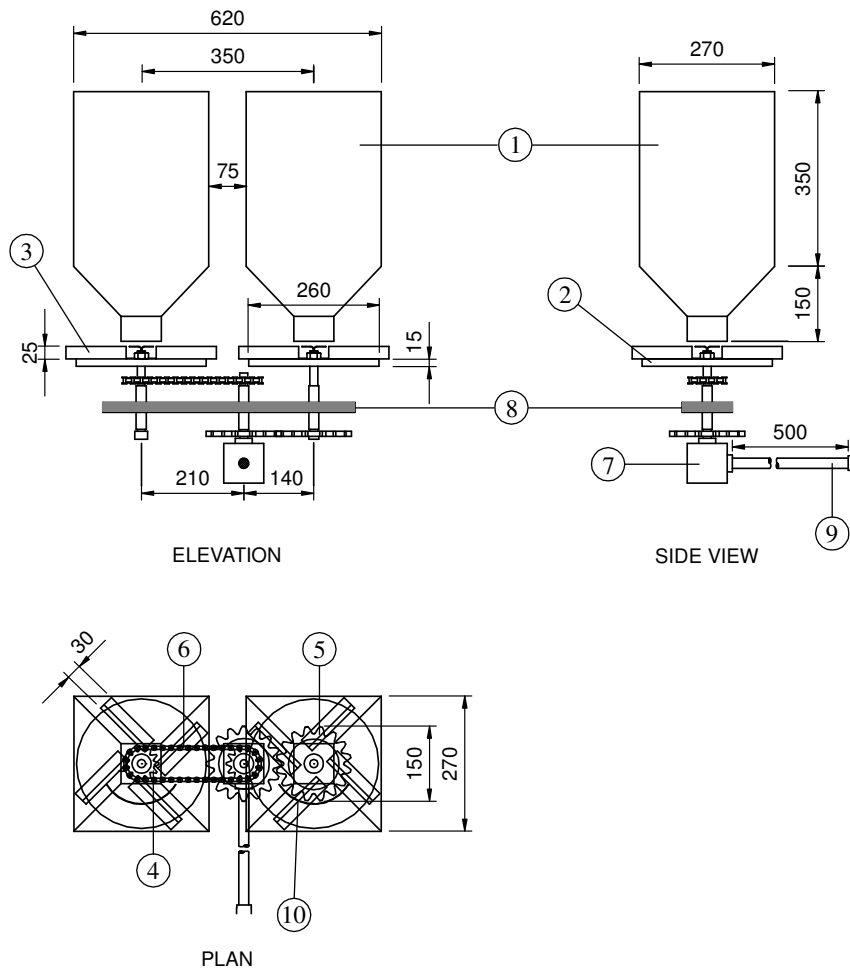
The elevation, plan and side view of the spreading device of the self propelled broadcasting machine.
